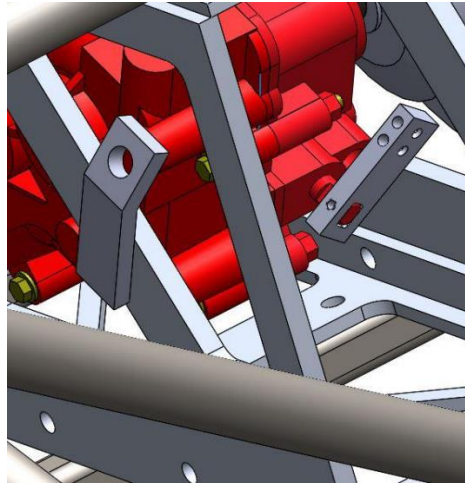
Shifting Cable Lock and Shifting Lever Solidworks
